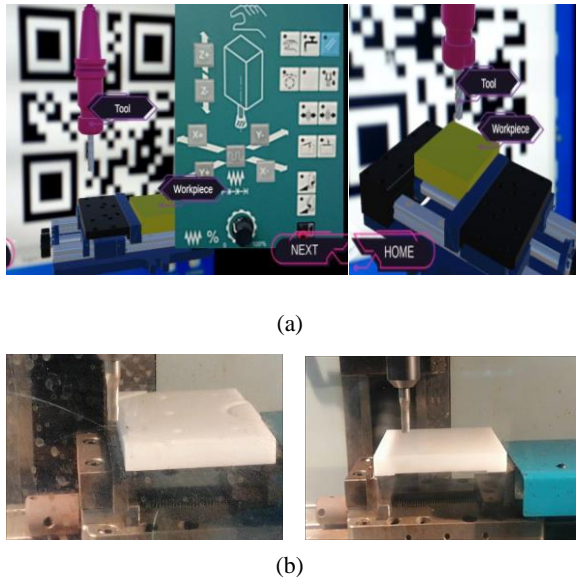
(a) AR environment for datum and tool offset set-up procedure and, (b) real scene for datum and tool offset set-up procedure
